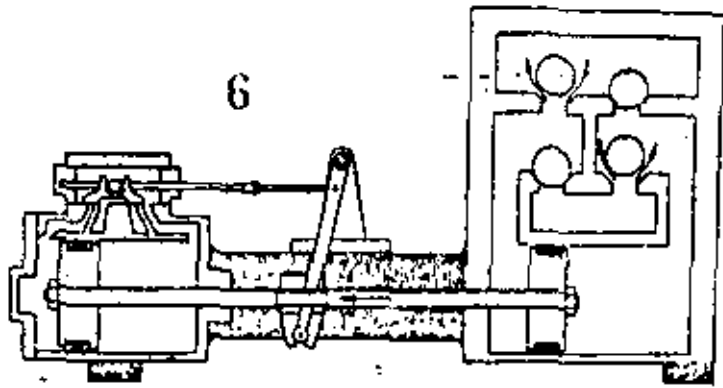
HORIZONTAL DOUBLE-ACTING STEAM PUMP
